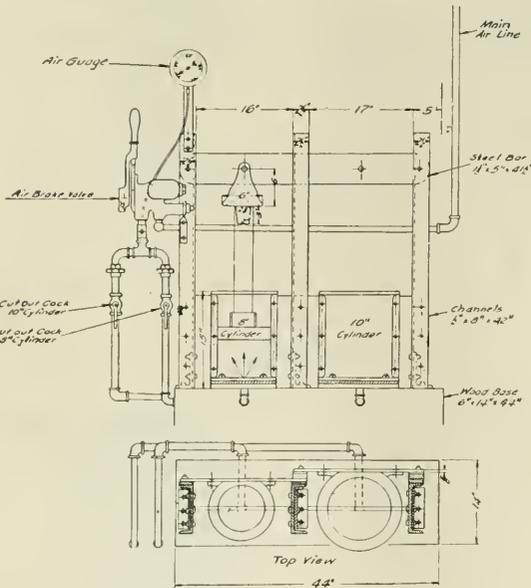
Brake Cylinder Packing Leather Test Rack
